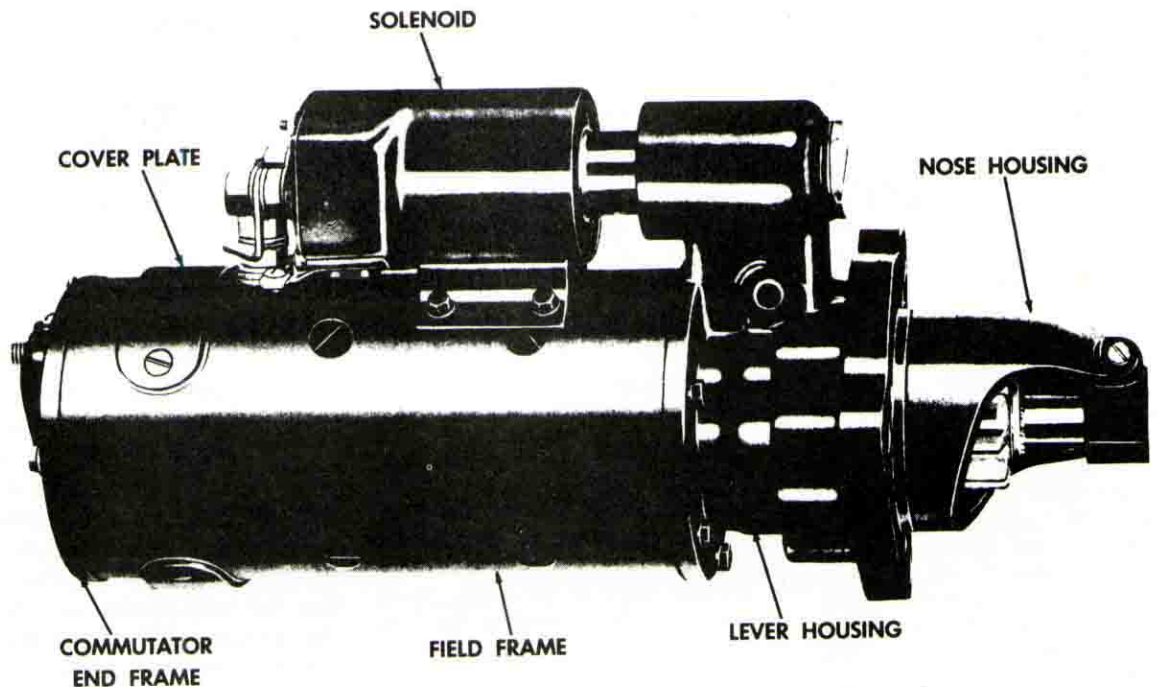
Typical enclosed shift lever type heavy duty cranking motor.
